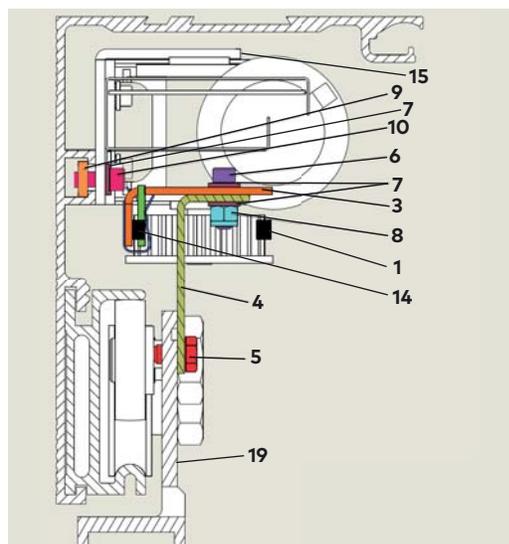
Rear of belt bracket assembly to carrier bar
